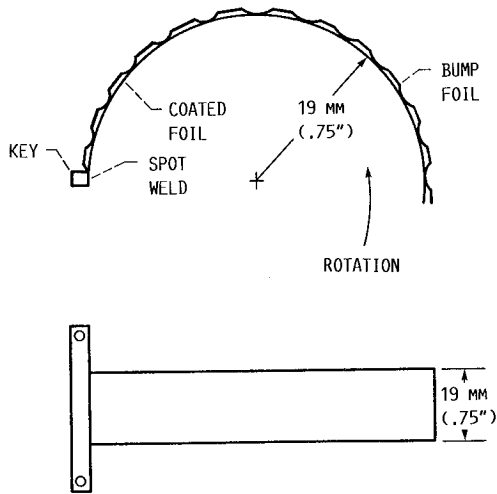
COMPLIANT FOIL GAS BEARING ASSEMBLY.
